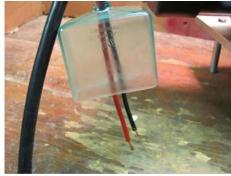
Strip ends of black and red wires. Thread through capacitor cap.
